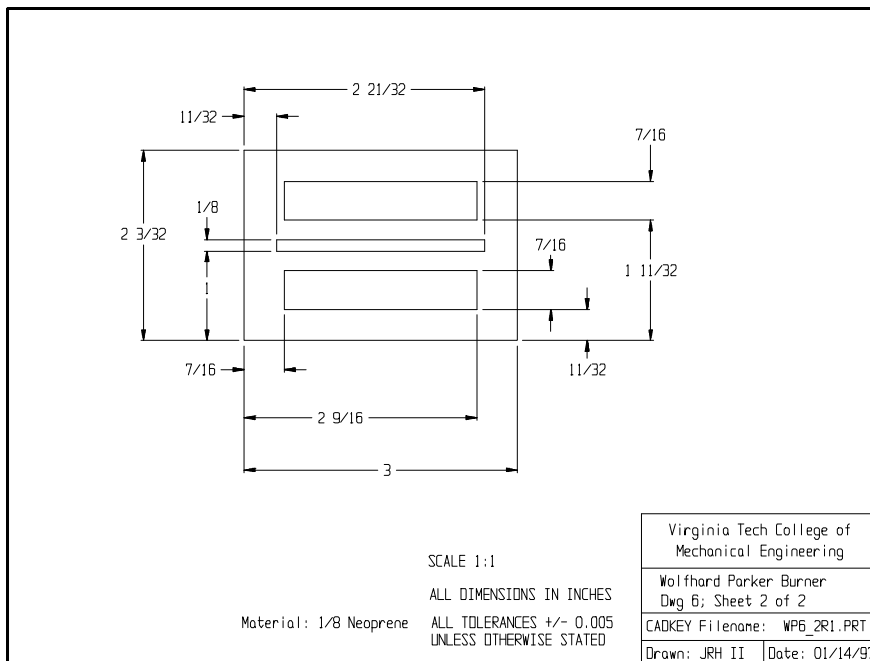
Burner Gas Inlet Manifold Gasket, Drawing 6 Sheet 2 of 2
